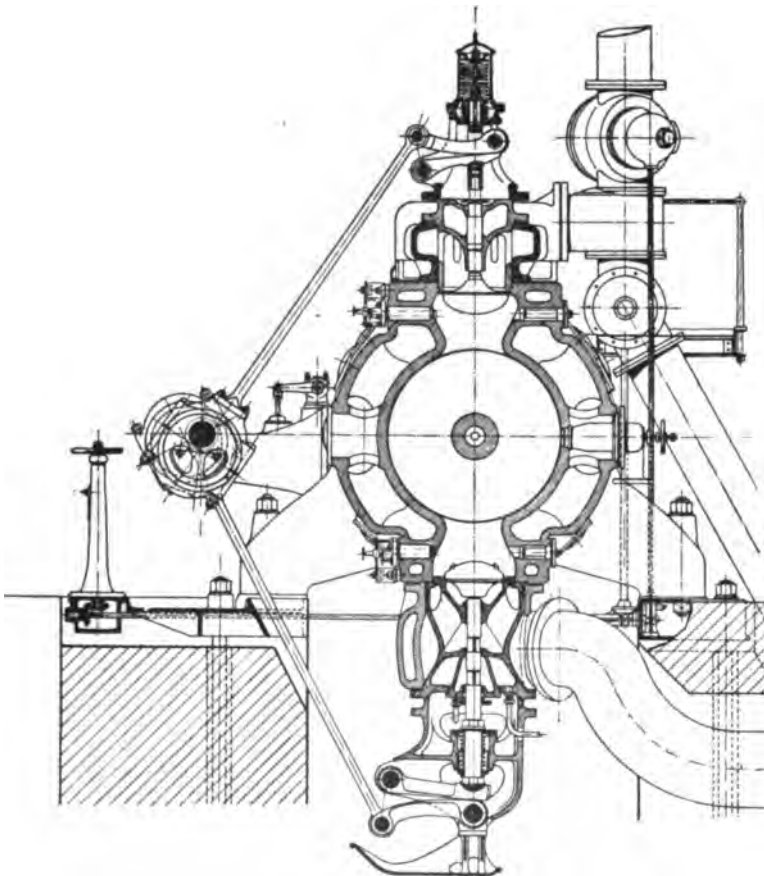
Details of Valve Gear, Nürnberg Engine.
